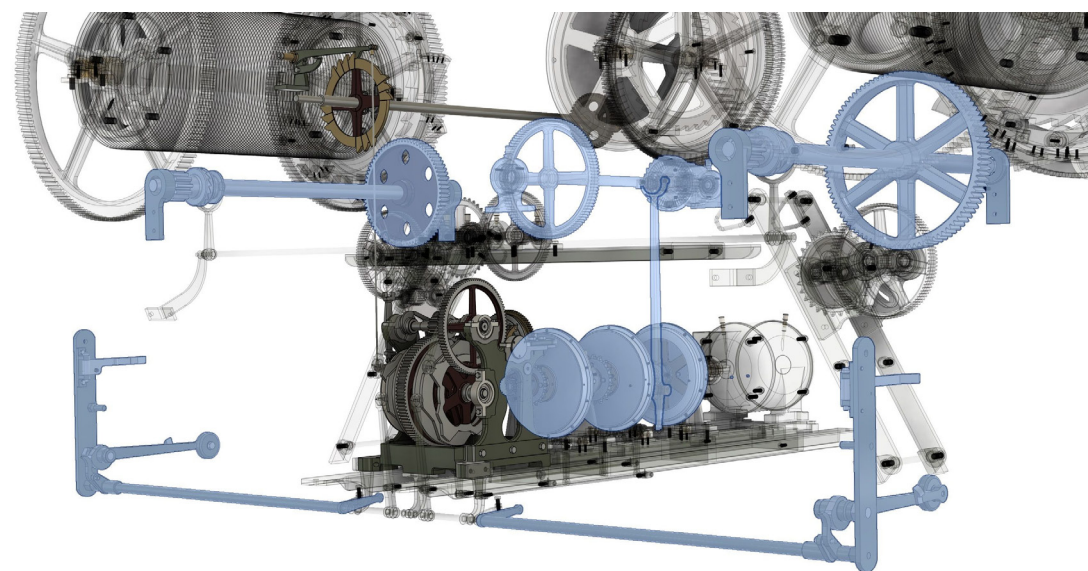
The barrel drive dogs are engaged, but the driveshaft clutch assemblies are disengaged. They will be engaged by lifting the two arms to the lower left and right. Image Cumbria Clock Company.
